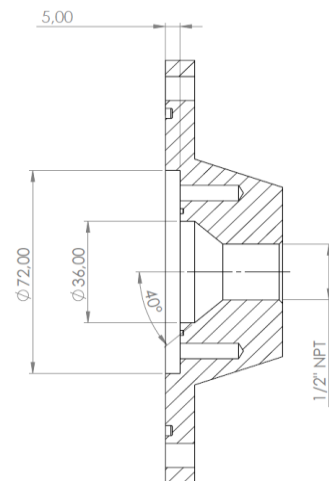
Section view of the Injector Head drawing (simplified version). Dimensions in millimeters.
